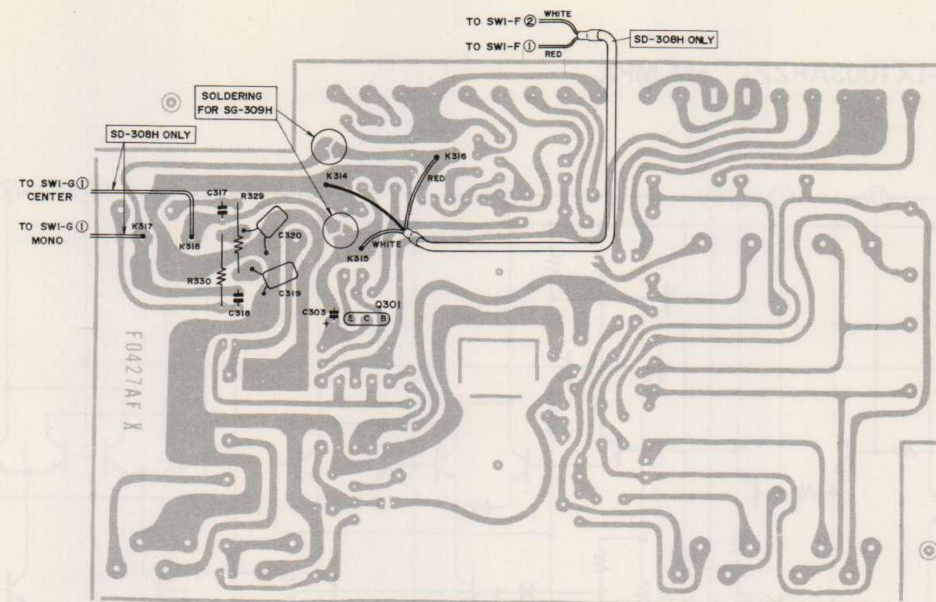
PARTS LAYOUT ON NEW PRE. AMP. BOARD
